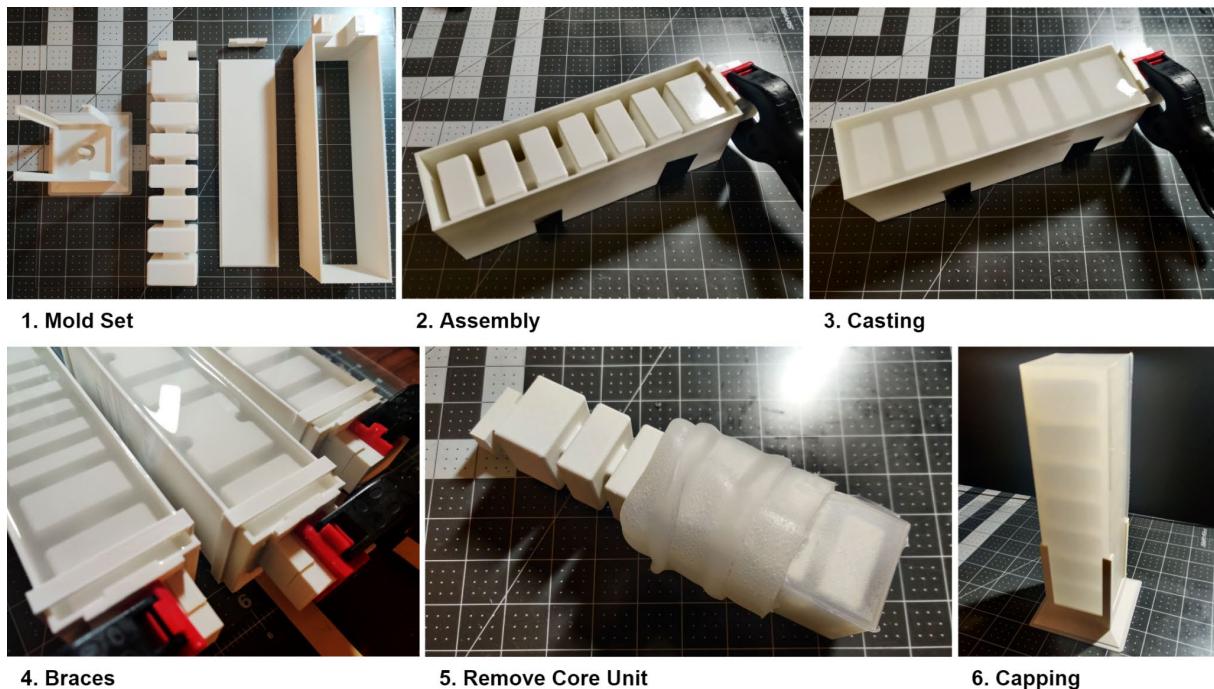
Final Mold Design and Fabrication Process - Second Iteration
